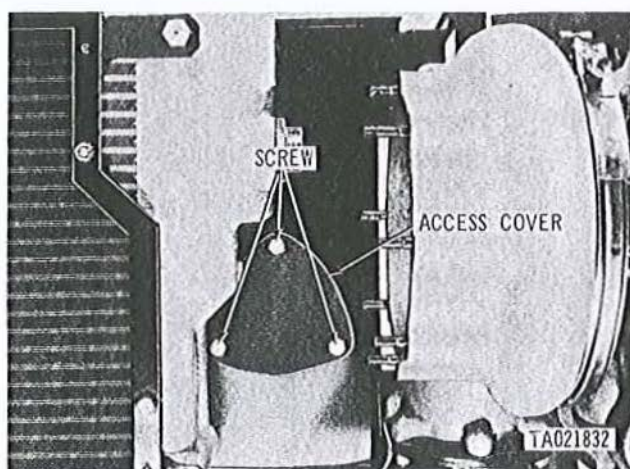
Removing or installing valve timing access cover. 2-157). Turn valve adjusting screw and set valve clearance to 0.100 inch, using thickness gage blade part number 10882617. Gage blade must move through clearance with a slight drag. Torque tighten lock nut to 175 pound-inches after setting clearance. Check clearance to make certain setting has not changed.
